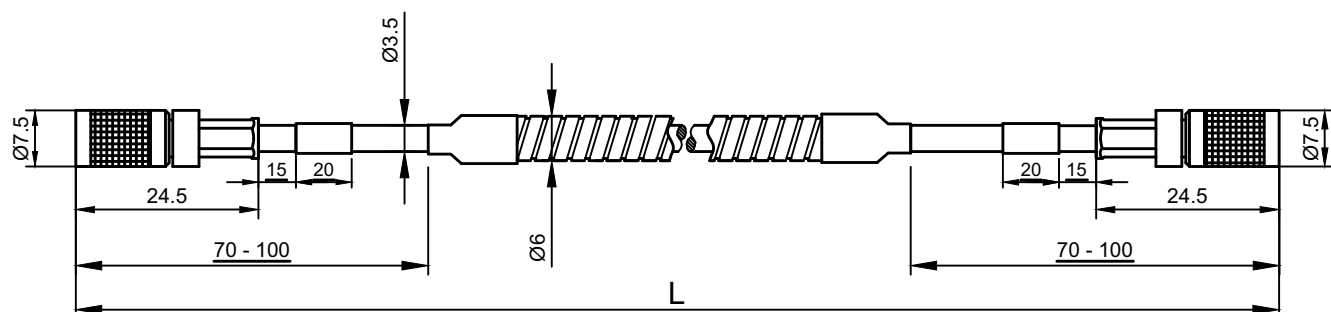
Dimensions of connection cable ds82x.ec102 (steel protection) mechanical reinforcement
